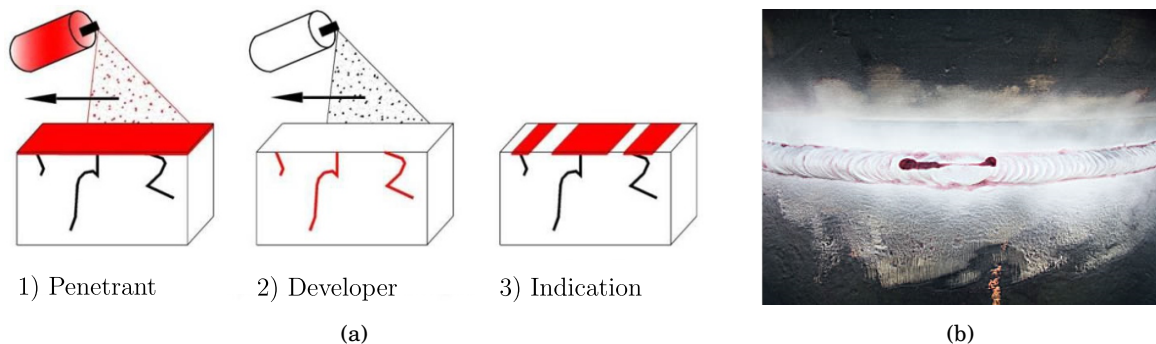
Basic principle of PT: (a) schematic of necessary steps for liquid penetrant testing; (b) photo of a surface crack at a weld seam [106].
